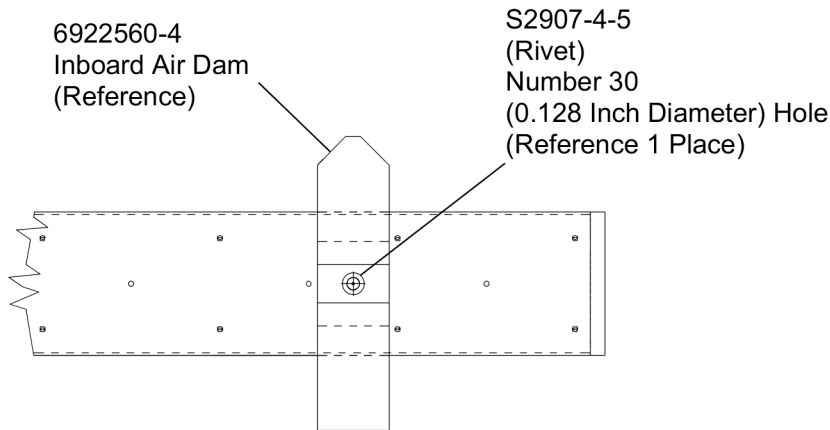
Sealing Between Piccolo Tubes And Light Box Fasteners (Sheet 3)
